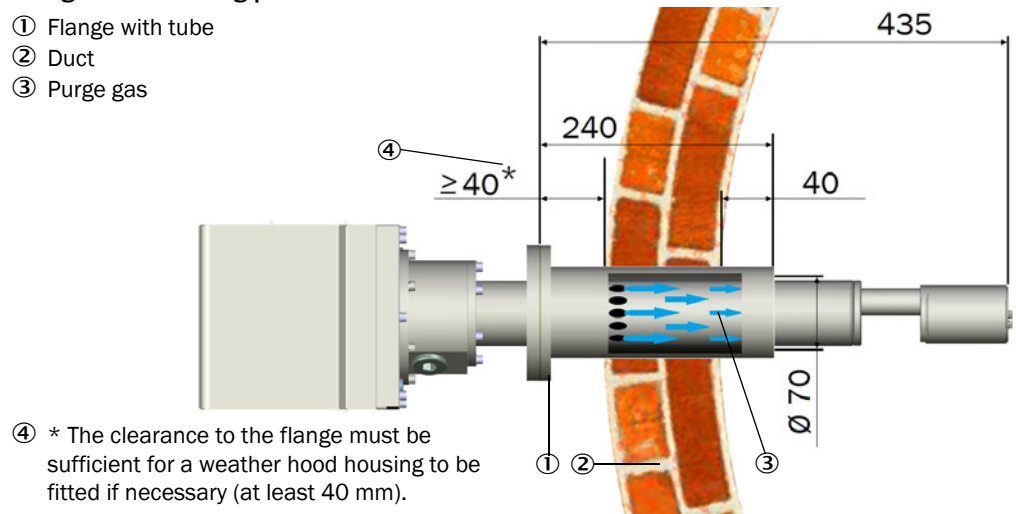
Fitting the flange with tube (all dimensions in mm)
